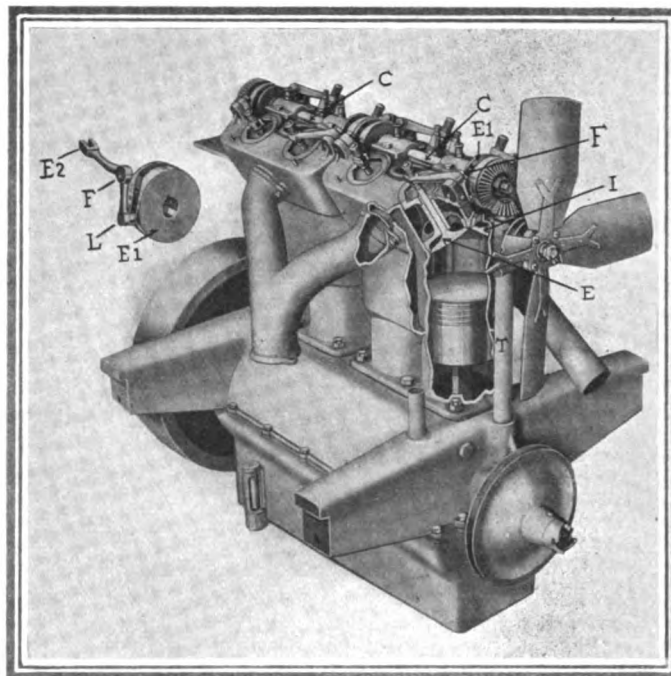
Exhaust side of Mitchell motor, with part of casing removed to show the operation of the valves
